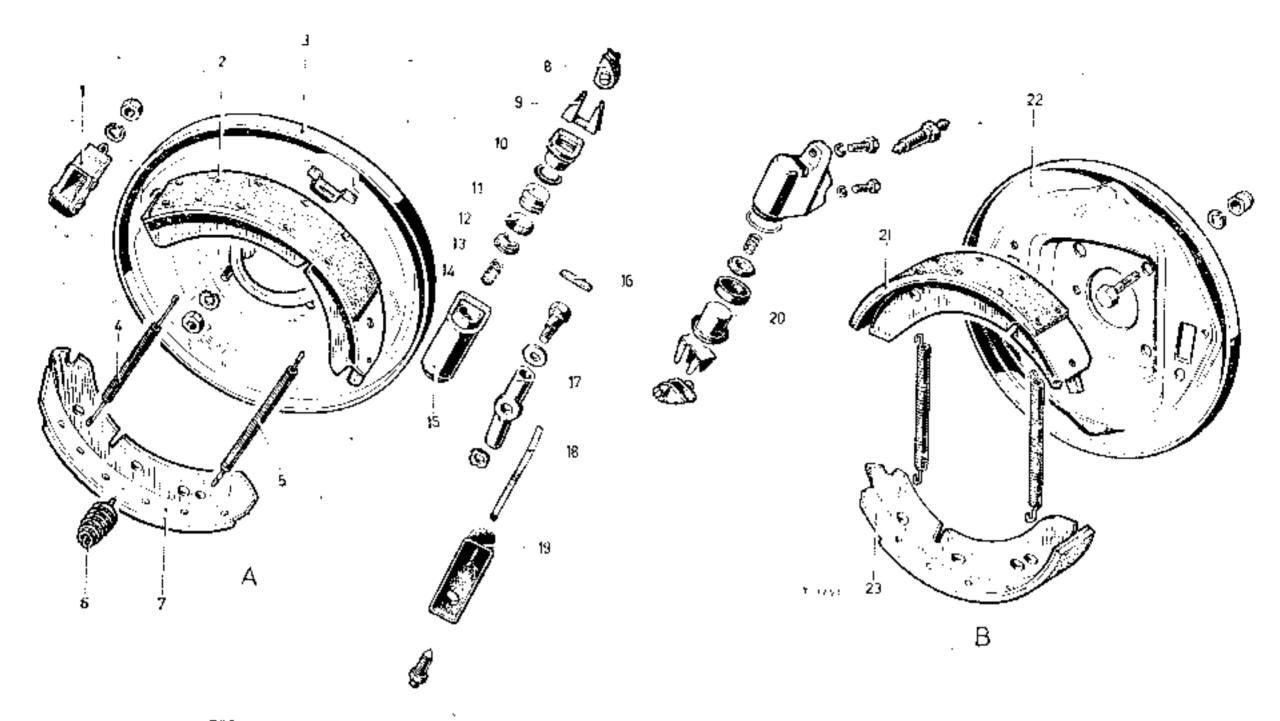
Front and rear brake assembly, exploded view (drum type)
